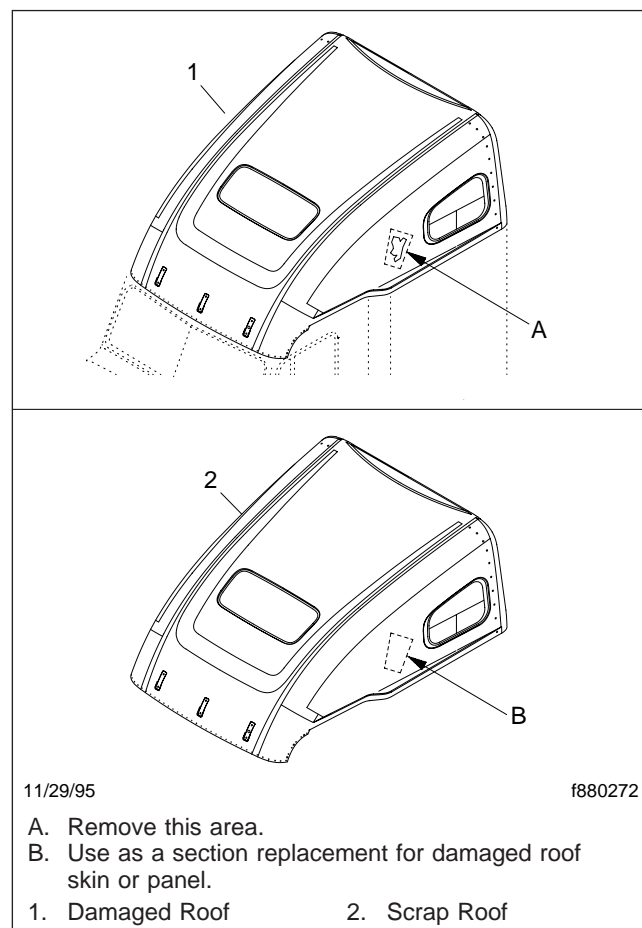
, Section Replacement of a Damaged Fiberglass Roof
